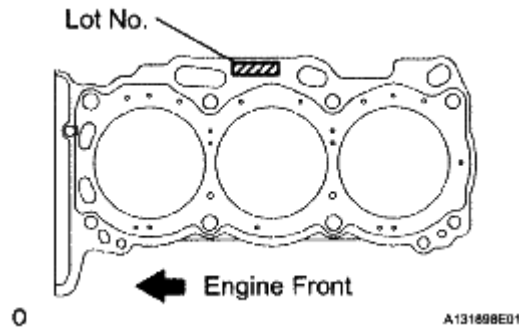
Placing Cylinder Head Gasket On Cylinder Block Surface With Front Face
